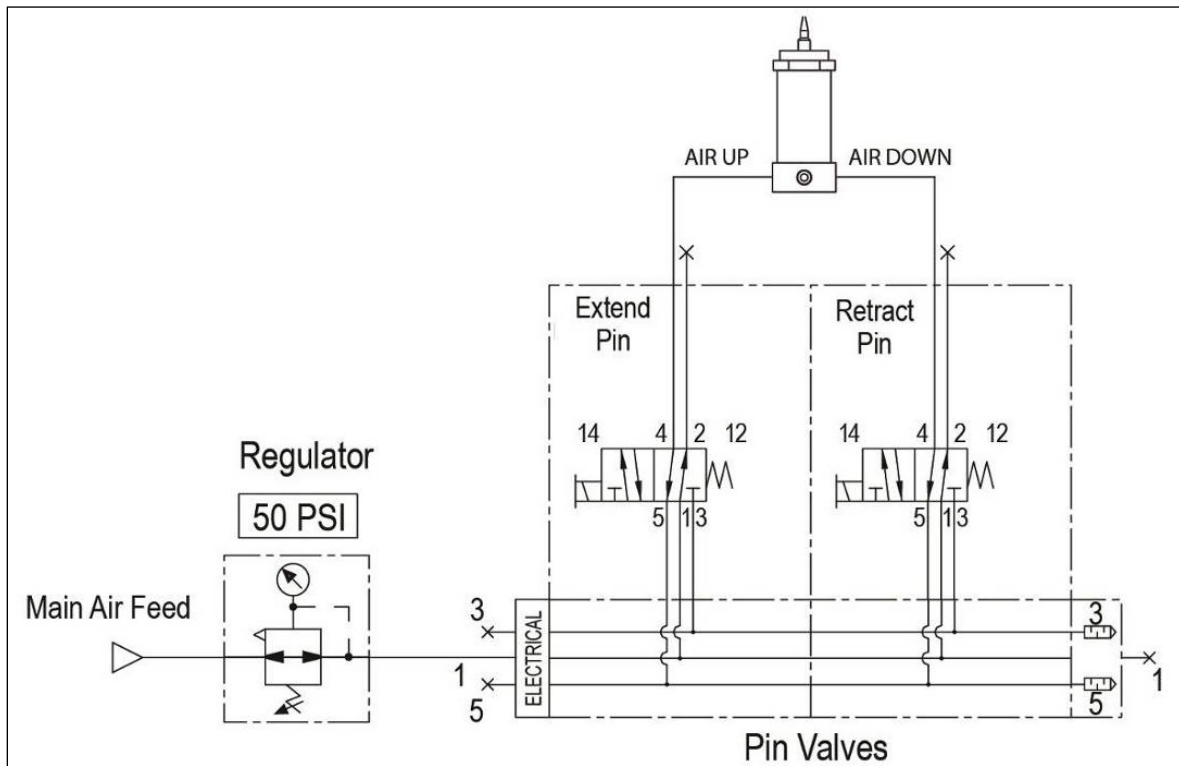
Pneumatic Connection Diagram for VeriFast™ IA Weld Body Used in Welding Ring Projections or Clinching Applications (Not applicable to Clamp Mount Assembly)
